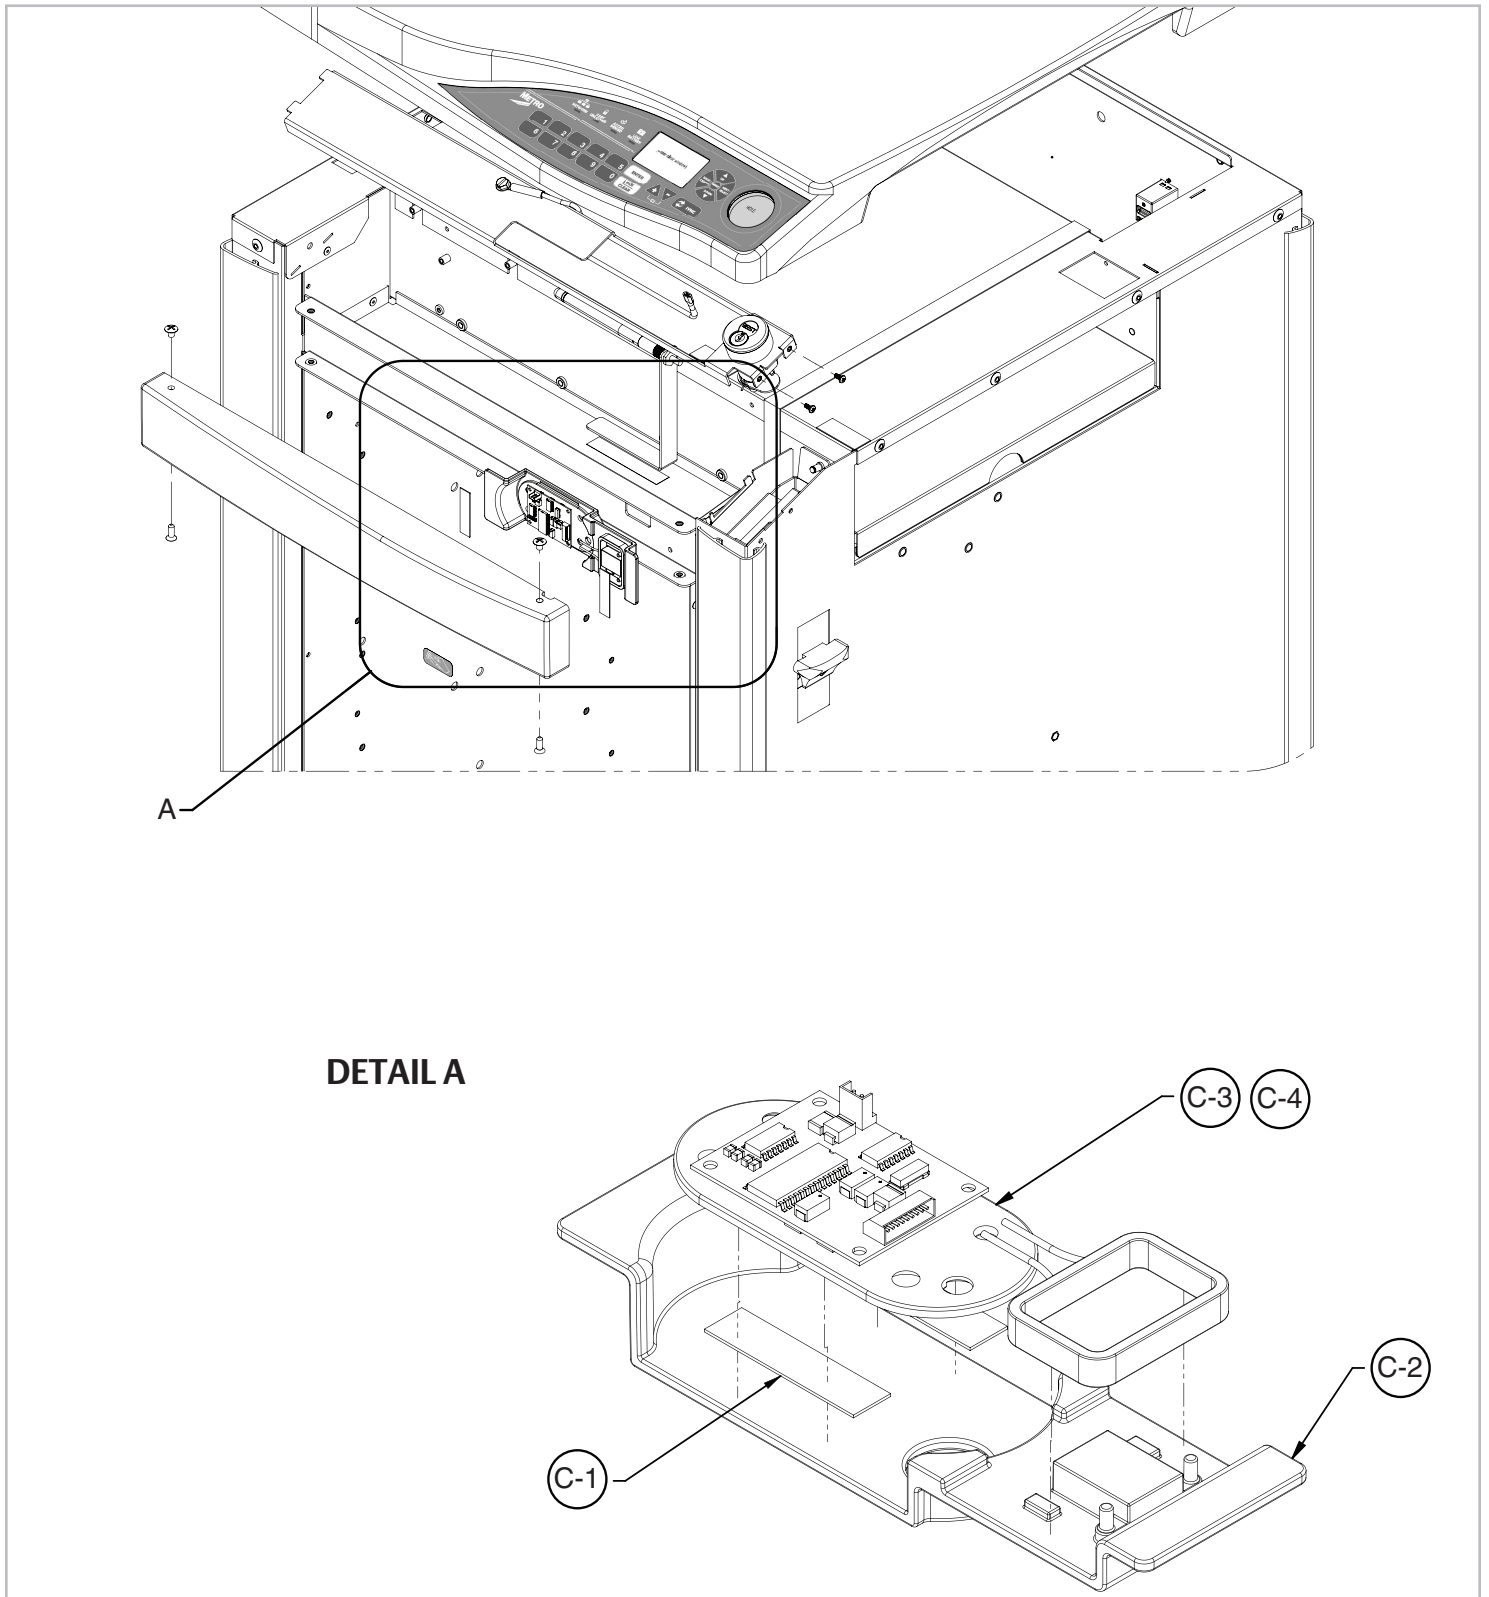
LOCATION OF PROXIMITY CARD READER ASSEMBLY
